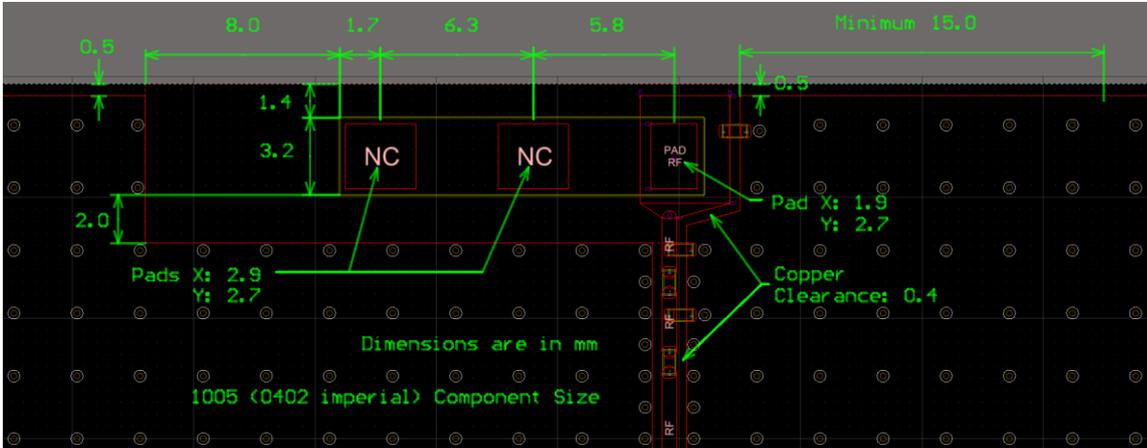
2D CAD outline top view drawing of the pads and copper pours that make up the Ethertronics 1001013 antenna footprint
